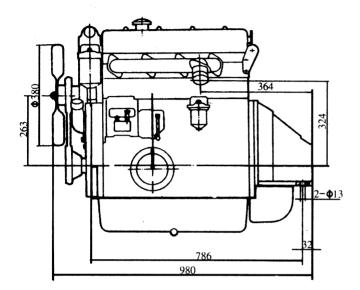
Outline drawing for 495Q1, 495Y1 - 1, 495G6 diesel engine
